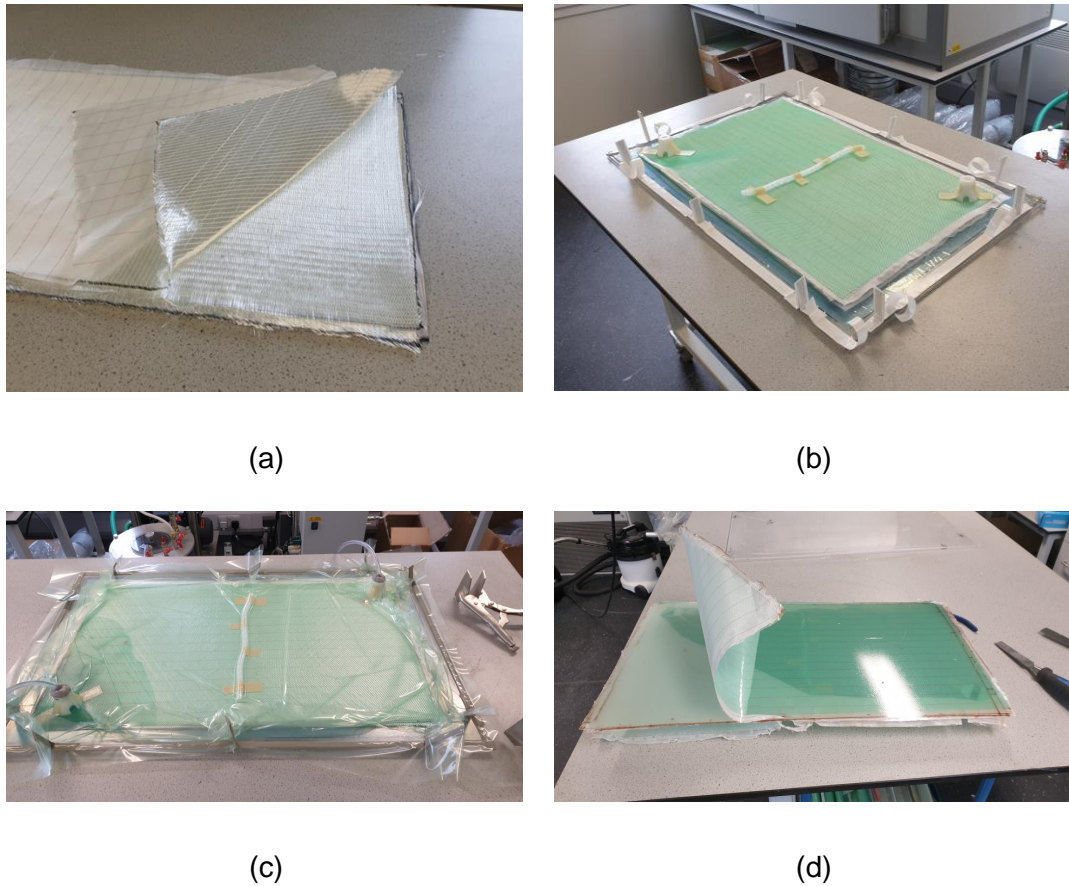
(a) Cut Glass Fibre Layup; (b) Layup on the Mound Before Bagging; (c) Vacuum Assisted Resin Injection; (d) Removal of Peel-Ply Layer Post-cure
